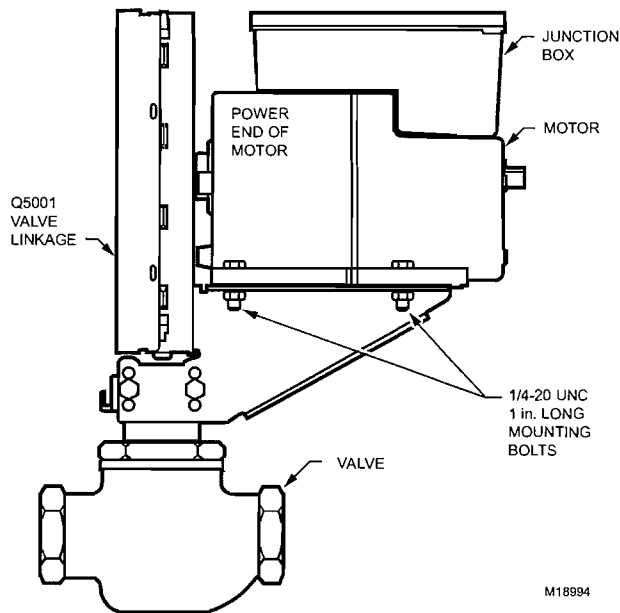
Mounting the Motor on a Q5001 Valve Linkage.
